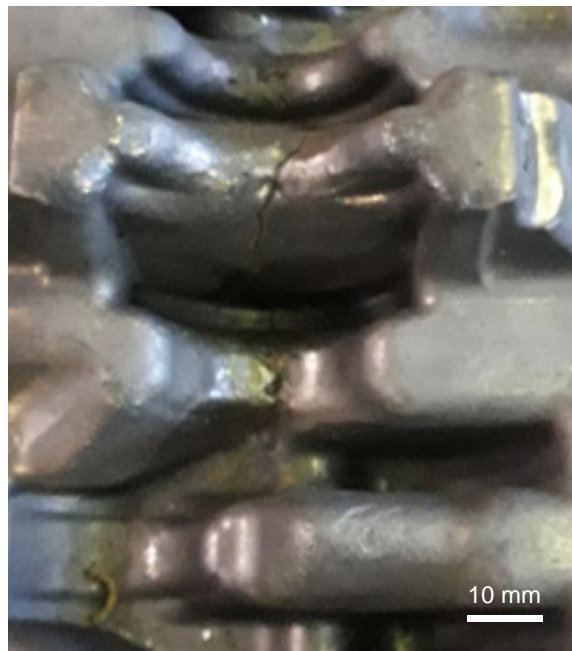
Example of cracks observed after crankshaft hot forging.
